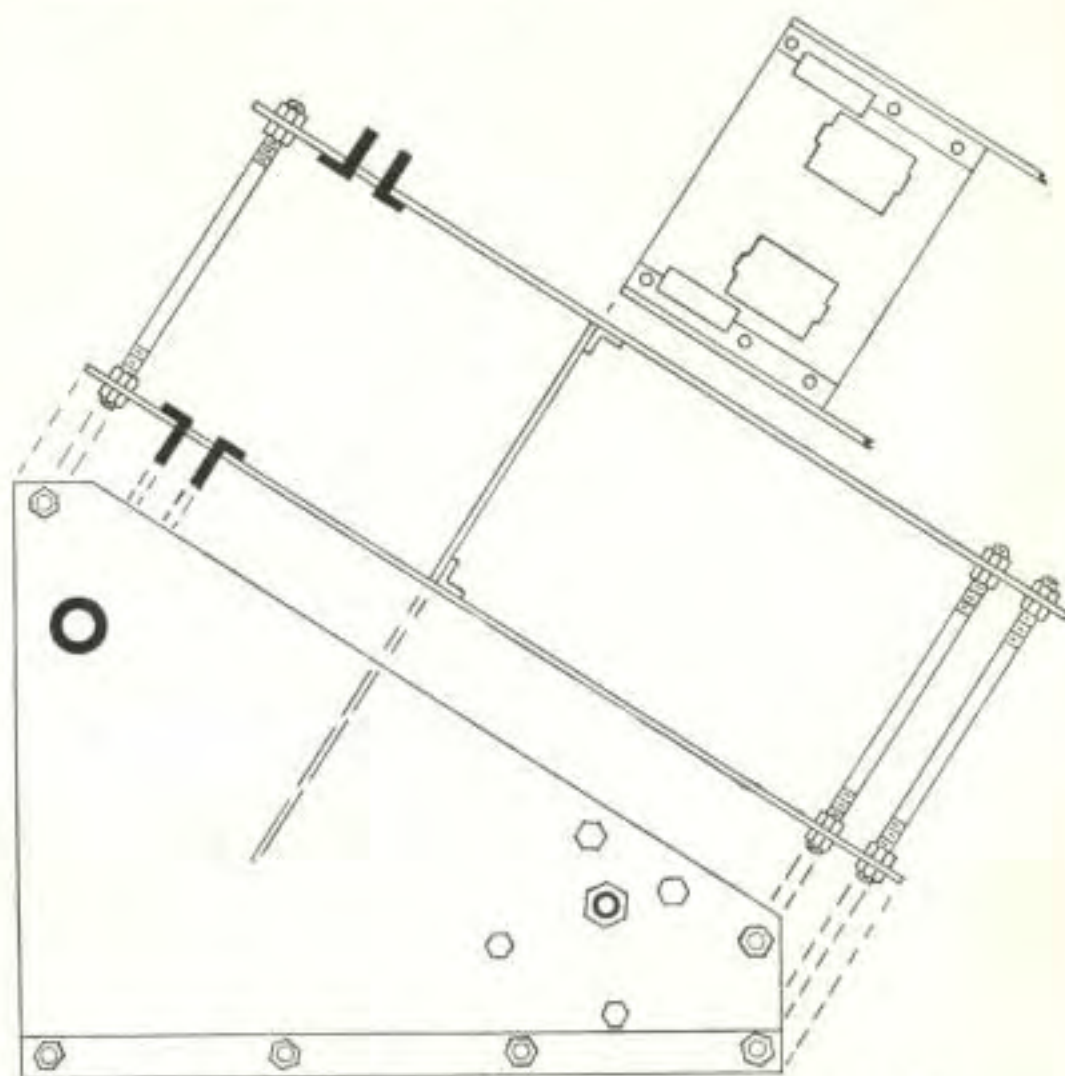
FRAME FOR MODEL PADDLER'S ENGINE
